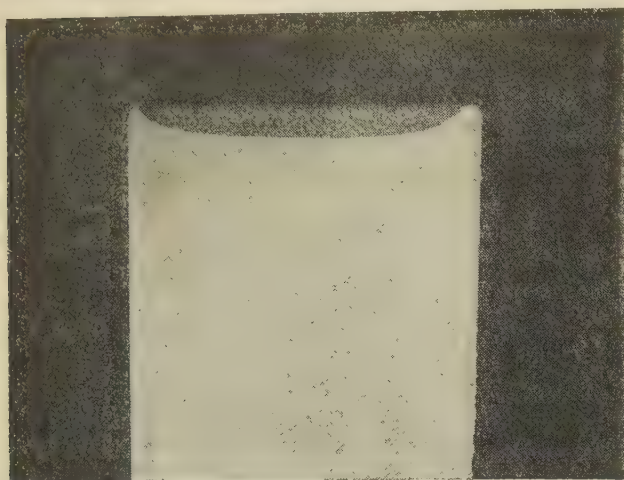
Solid nickel slug with pressed and sintered cathode pellet before machining.
